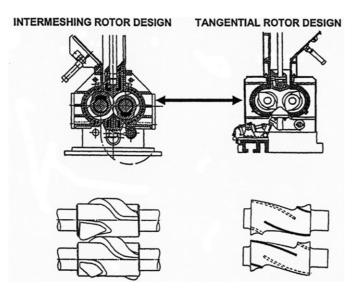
Internal mixers; left: intermeshing rotor design; right: tangential rotor design (Courtesy Farrel Corporation) [6]
